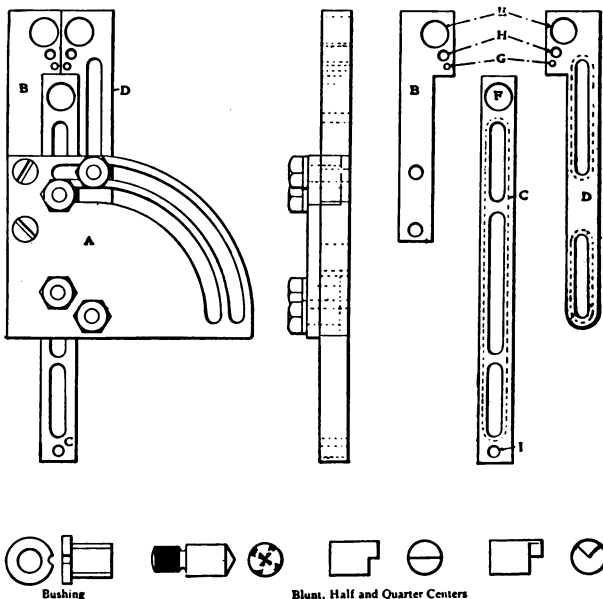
Adjustable Device for Locating Holes in Jigs.
